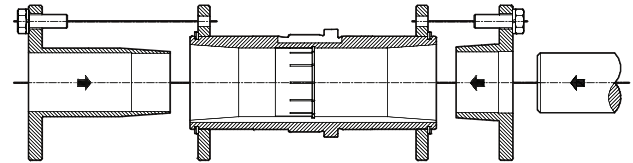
Short Shaft Bushing and Output Hub Assembly
